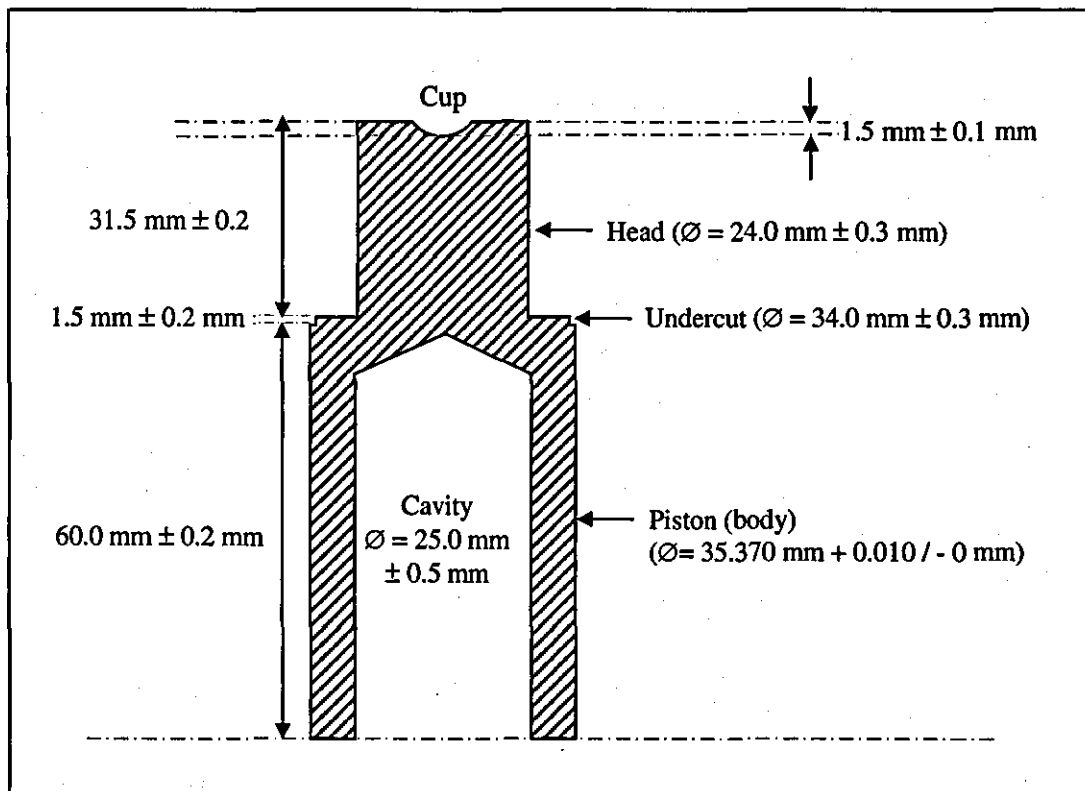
Final design of the 316 stainless steel piston blank (Design D)
